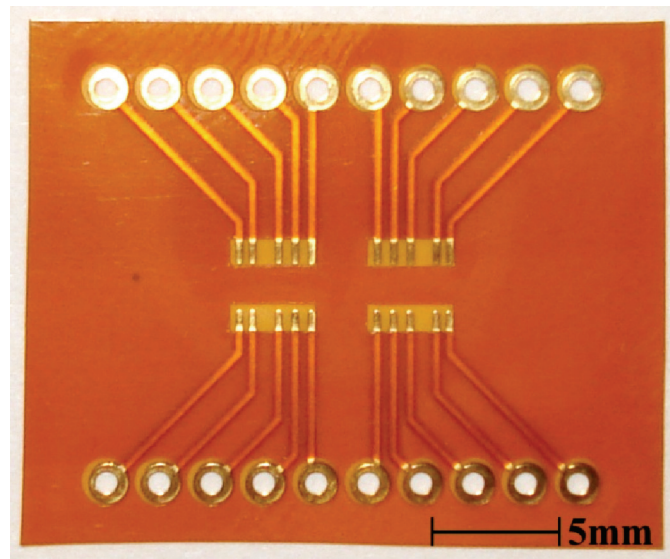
An FPCB used to determine wire bonding techniques for the scoliosis sensor strips.
